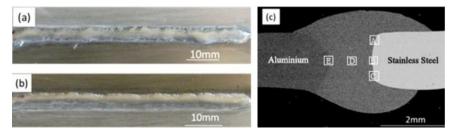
Appearances and cross-section of the aluminum-stainless steel butt joint: (a) the joint face (b) the joint back (c) the joint cross-section.
